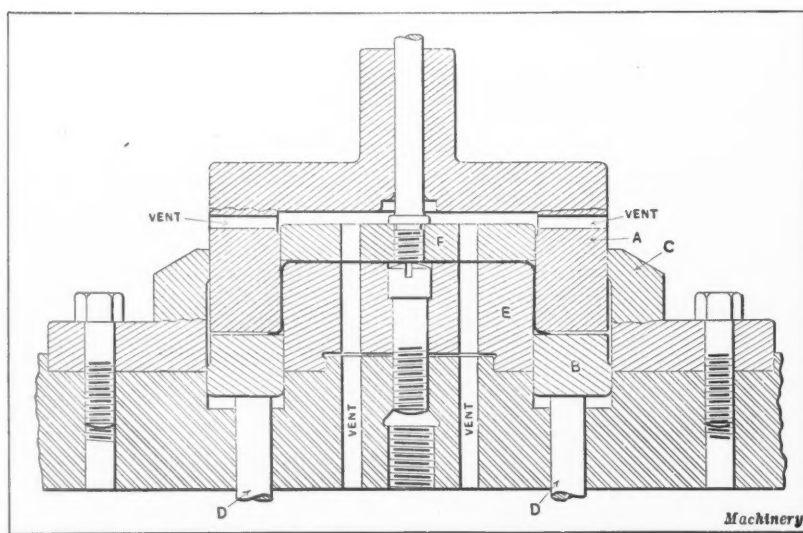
Blanking and Drawing Die which performs the First Operation on the Part
